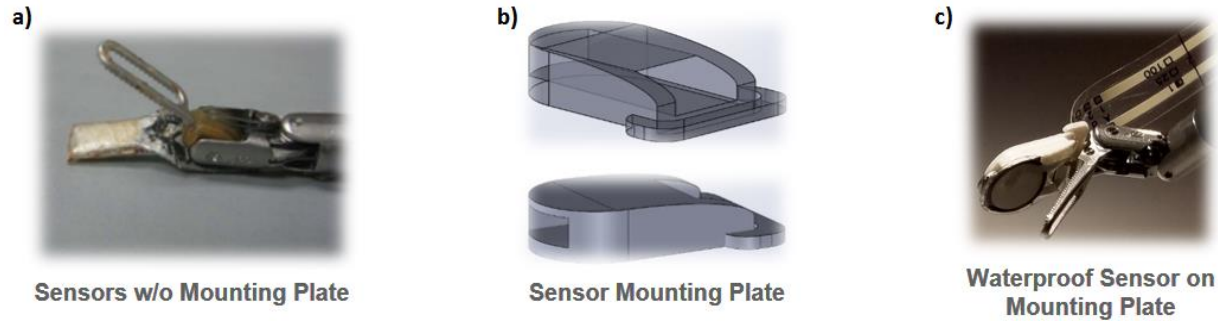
Traditional Sensor Mounting Mechanism vs. Sensor Installed on 3D Printed Mounting Plate
